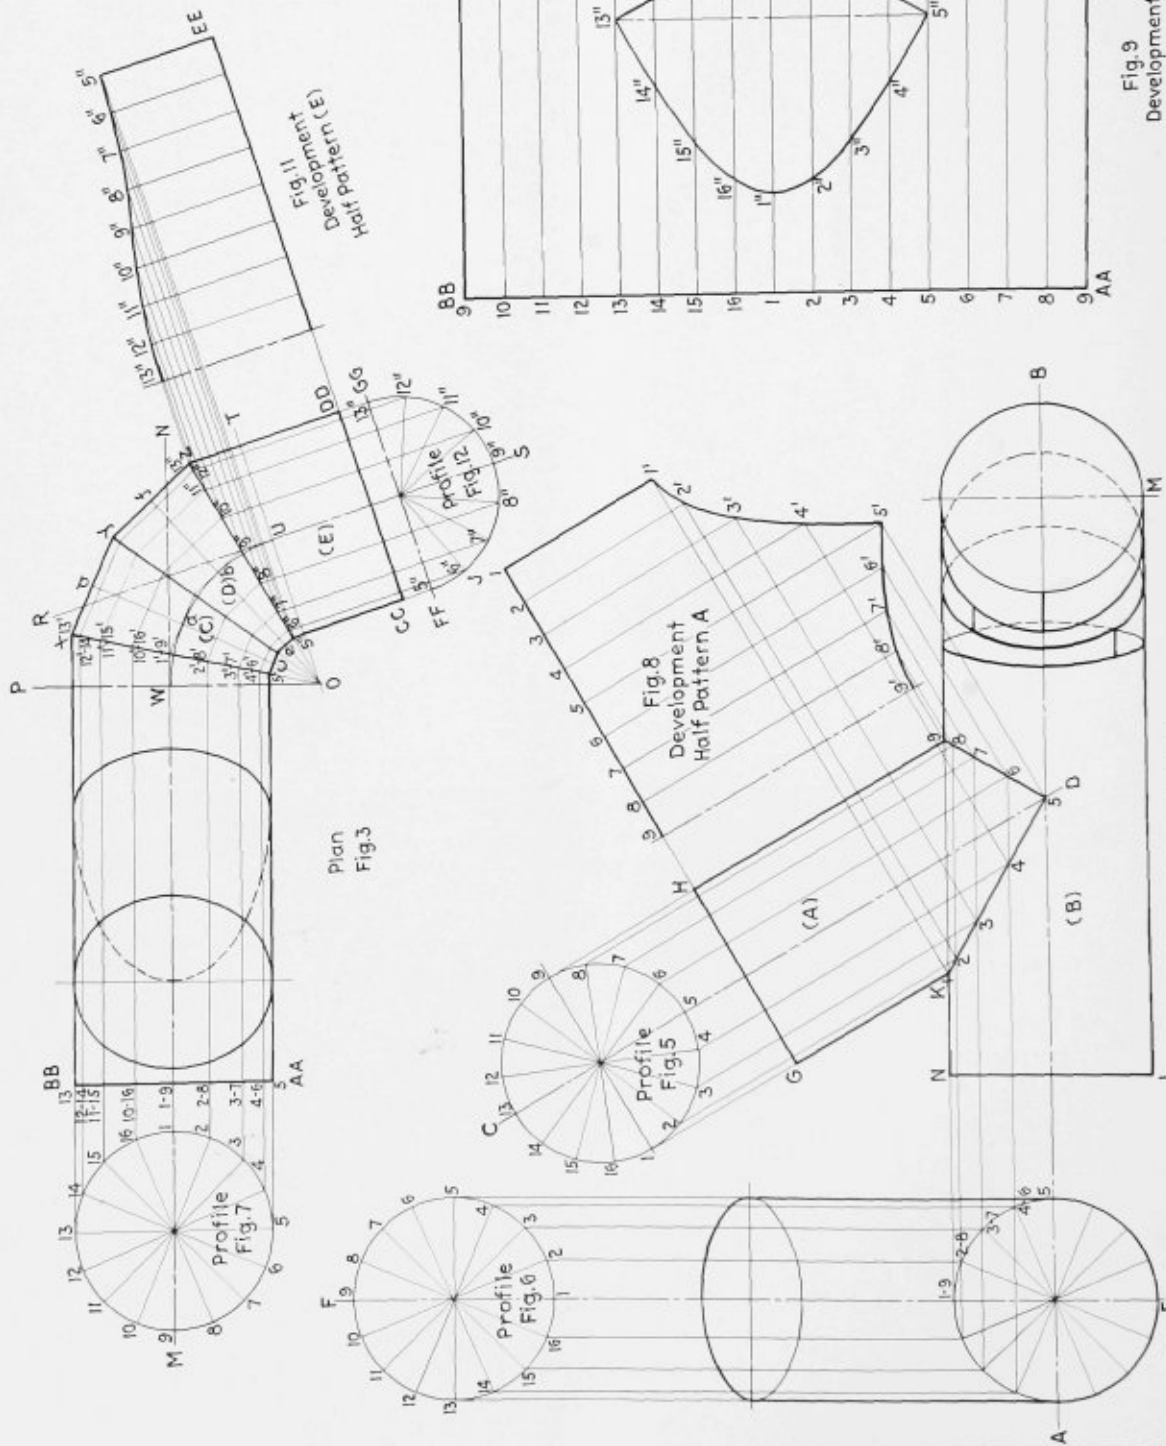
Elbow pipe connection with 30-degree offset outlet
